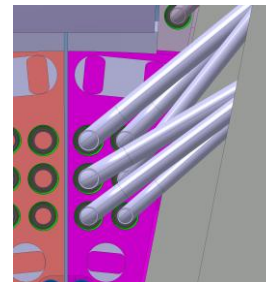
Clash of pipe extensions on lower inboard blanket
